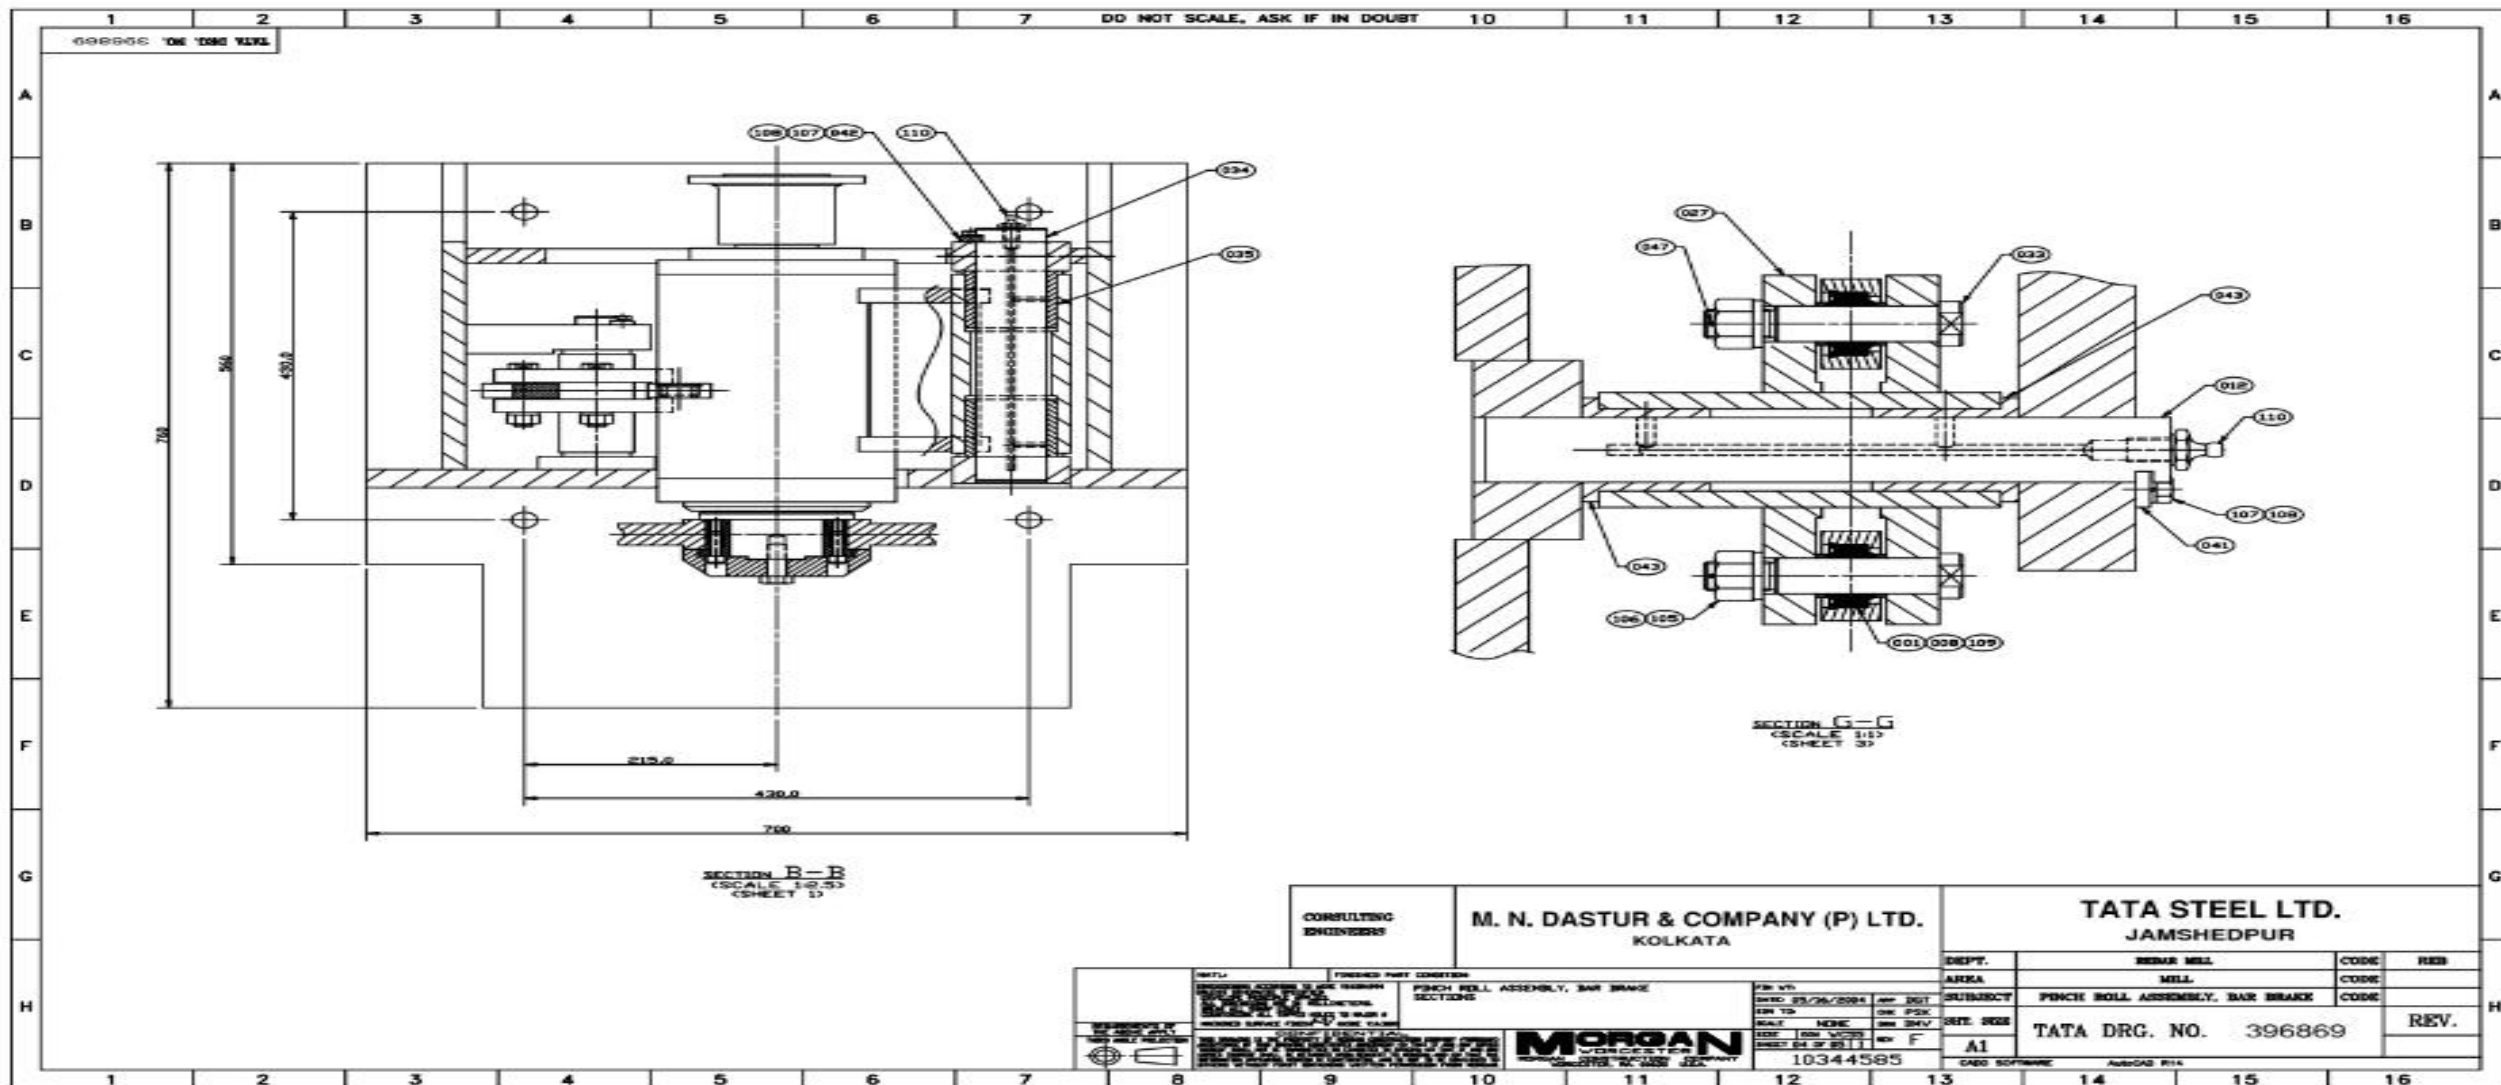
Overview Drawing of Cut Section of Bushes Added, Drawn in AutoCAD
